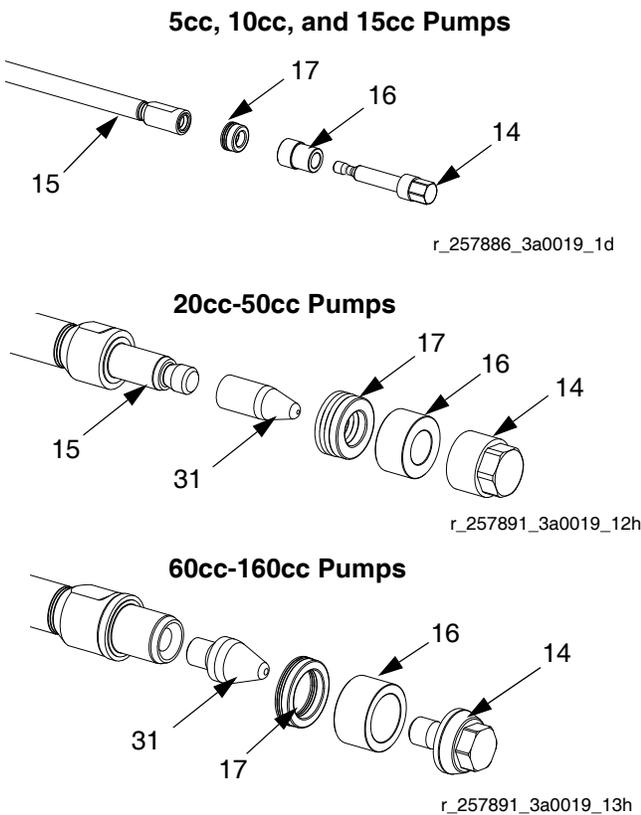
S1, S3 & S4 Pumps Piston Assembly Tool (31)
